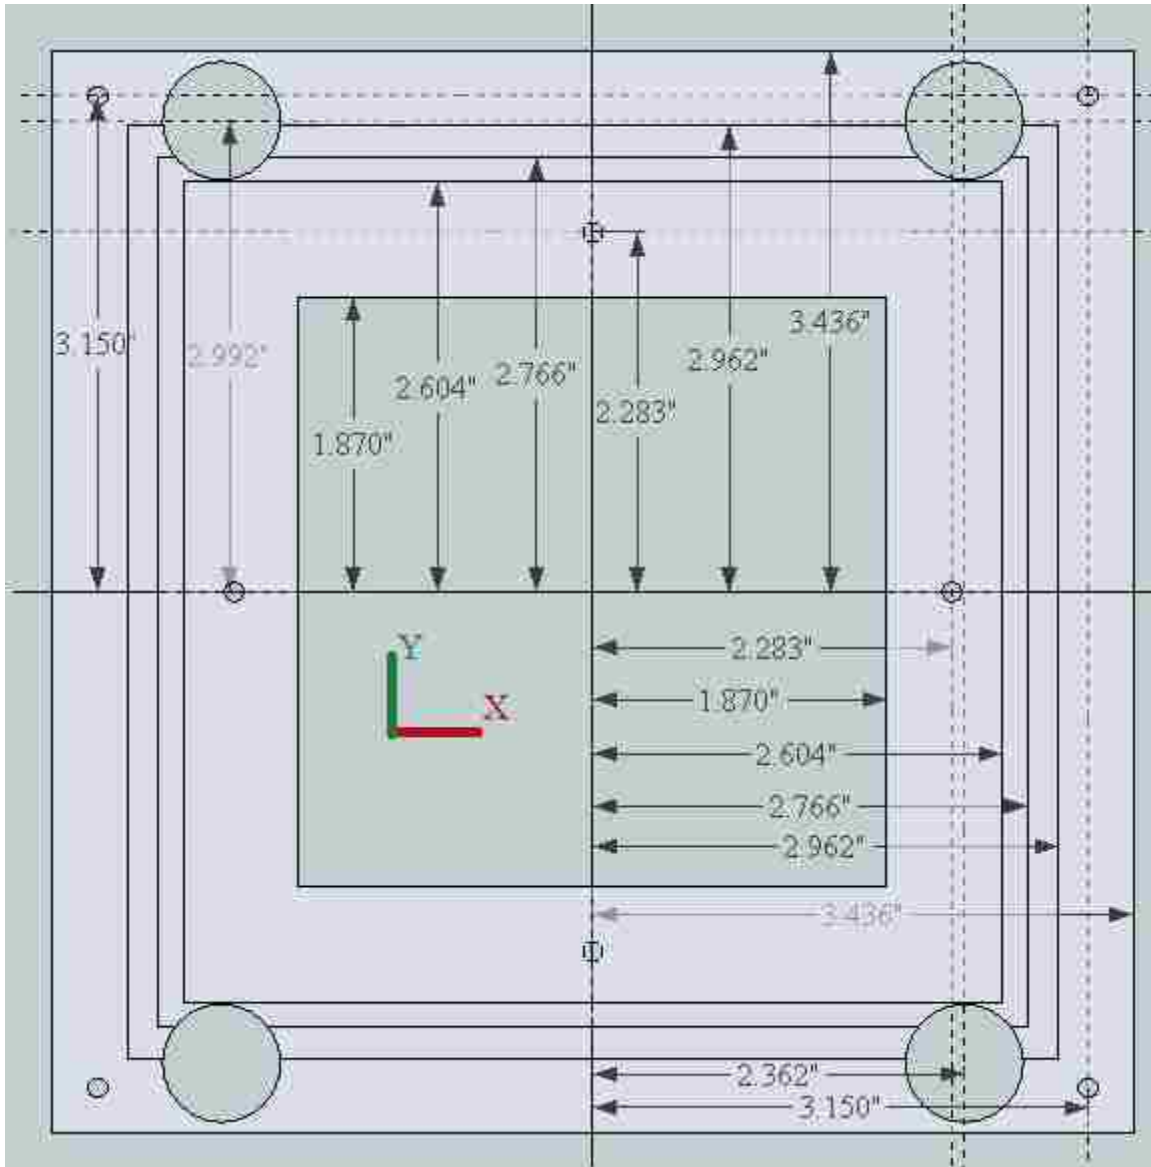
Top view of the 10x10 cm² lower trimmer lead plate illustrating the in-plane and cross-plane dimensions. The lower trimmer is square, such that all non-hole dimensions are equal in the in-plane and cross-plane dimensions.
